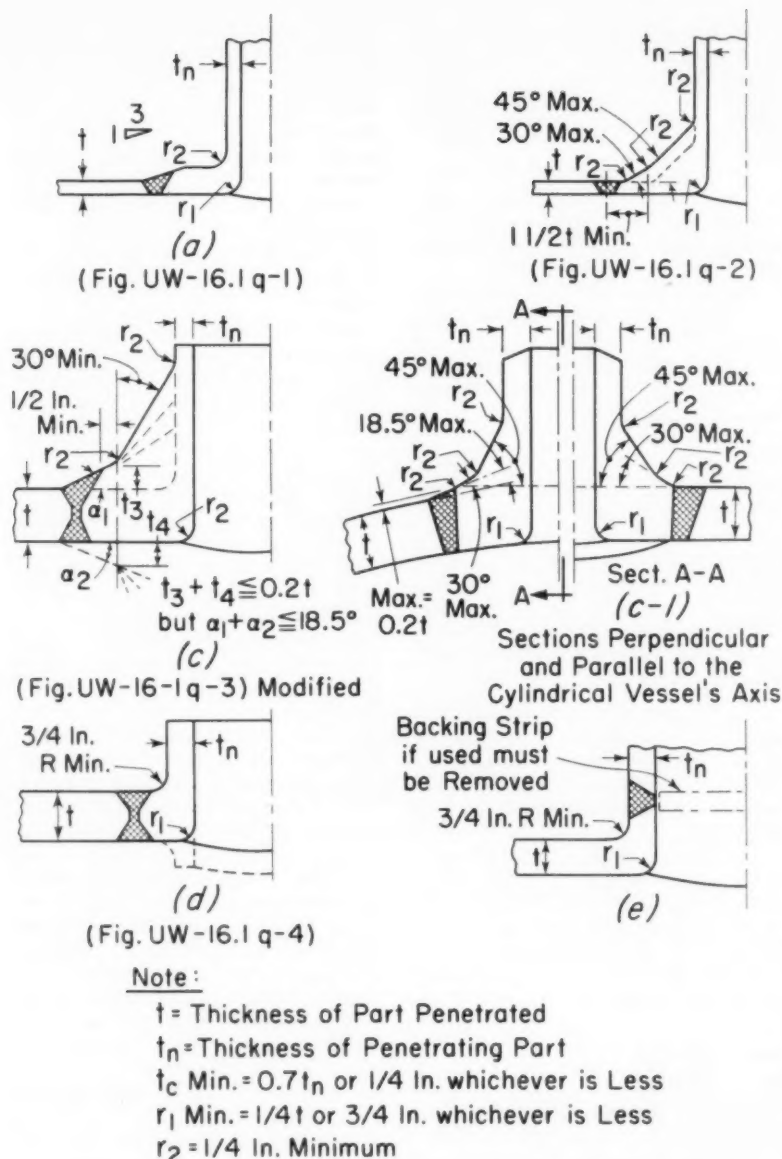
Acceptable welded nozzle attachments readily radiographed to Code standards
